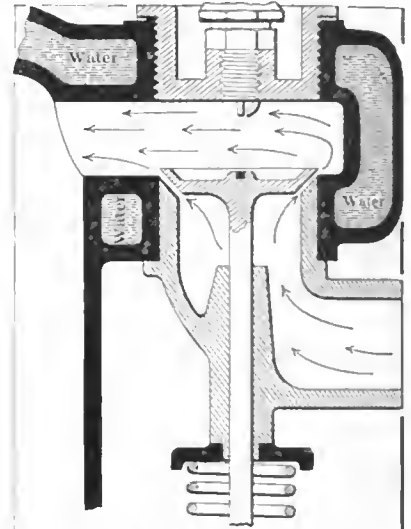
Design of valve having the advantages of the valve in the head without the location which is objected to
